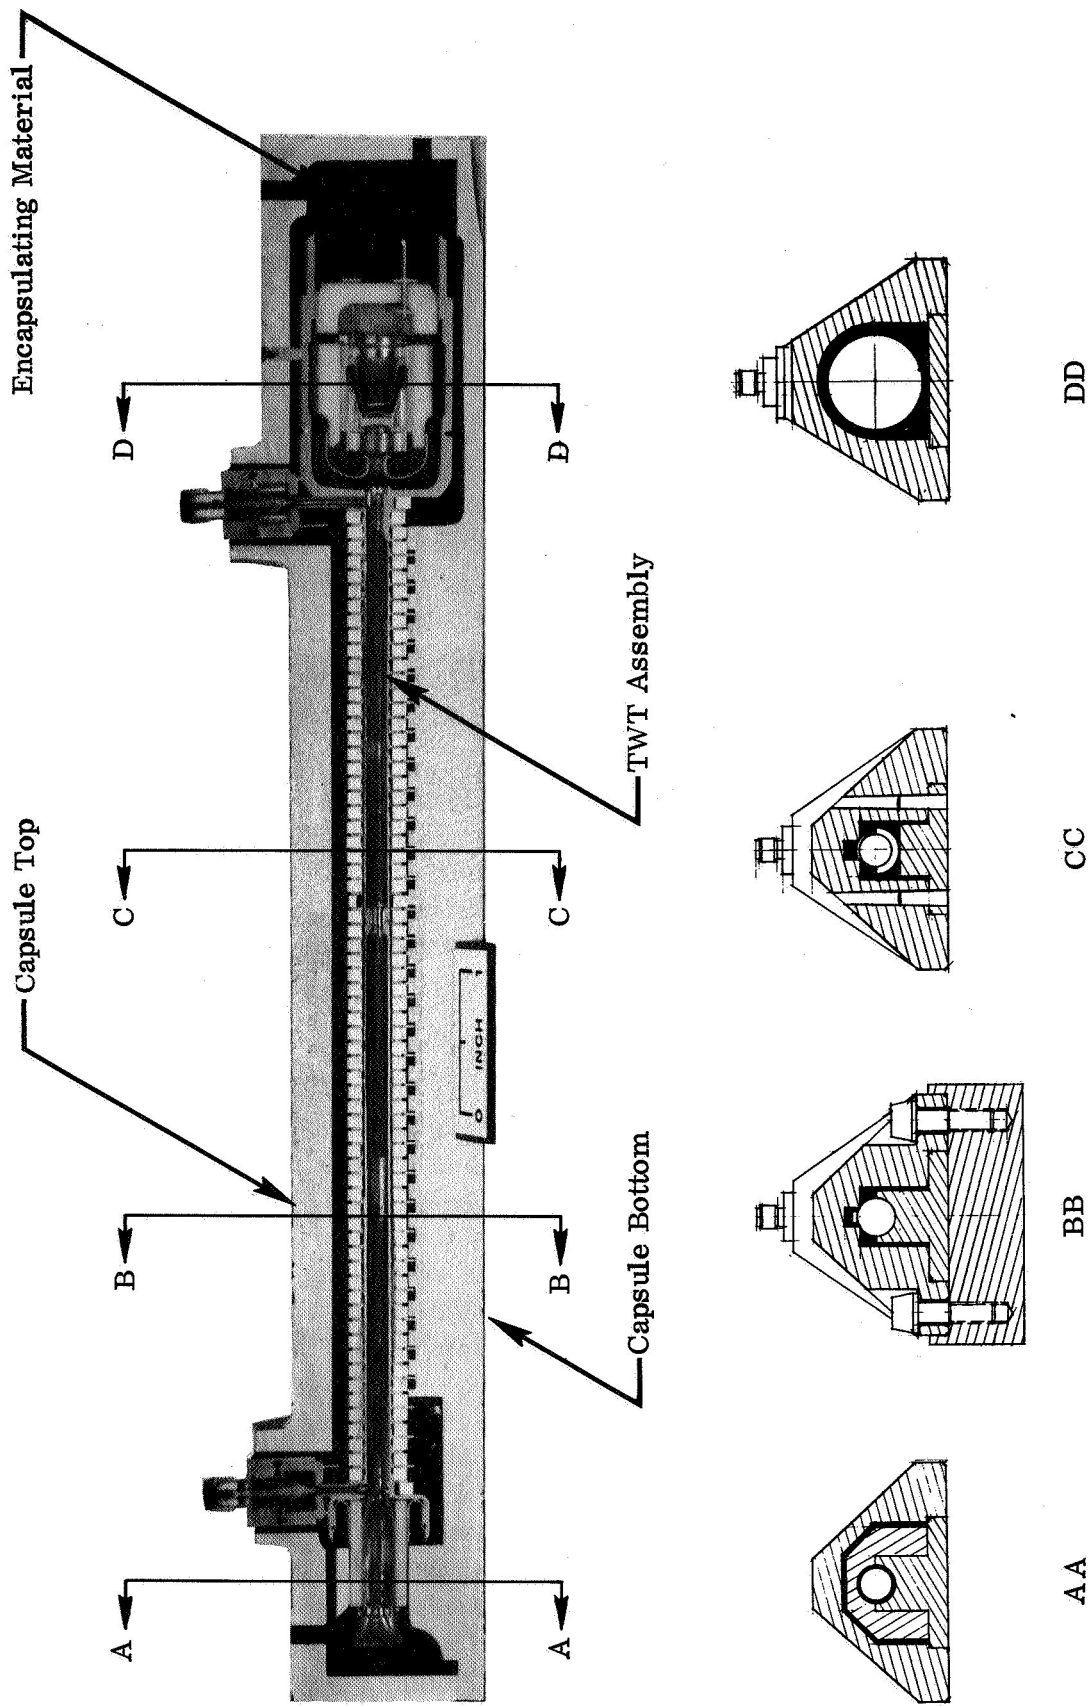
Photograph of an encapsulated WJ-398 TWT which has been machined in half to show assembly details. Also shown are section views of the assembly.
